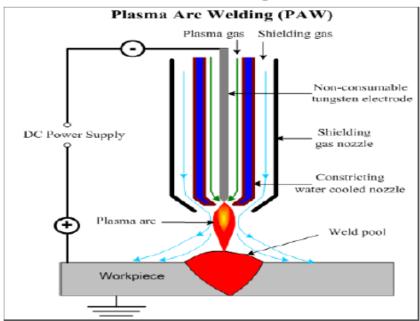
Schematic diagram of plasma arc welding systemInert gas consumption is high
